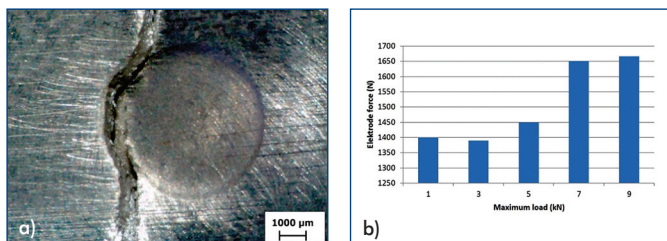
Shear test: a) fracture of test specimen, b) Results of shear test
